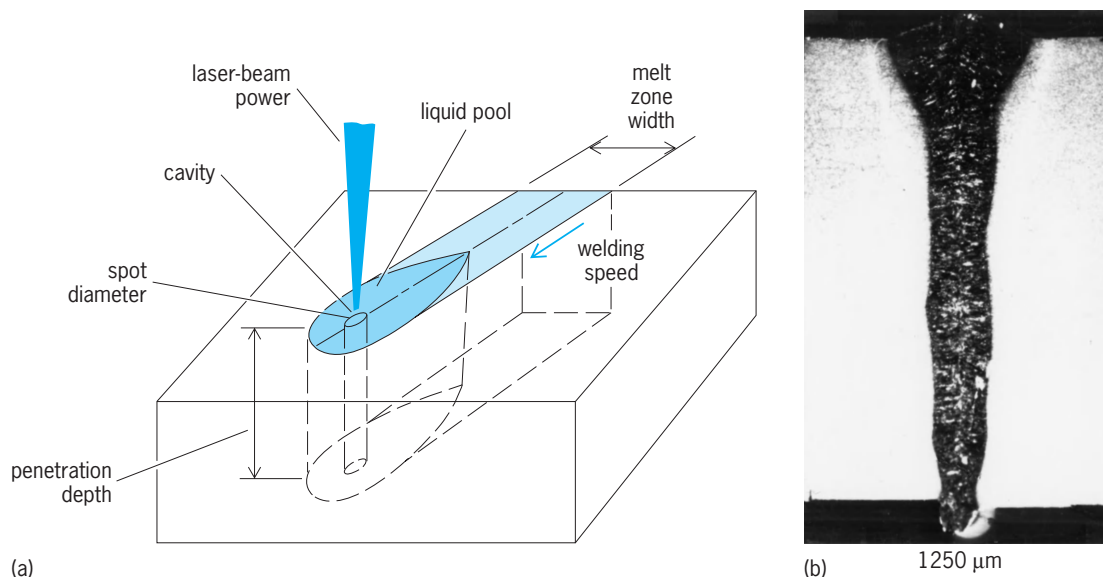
Deep-penetration welding characteristics. (a) Schematic diagram of the deep-penetration laser welding process. The laser beam creates a vapor column (deep-penetration cavity) and deposits energy through the thickness of the workpiece. (b) Typical weld.
